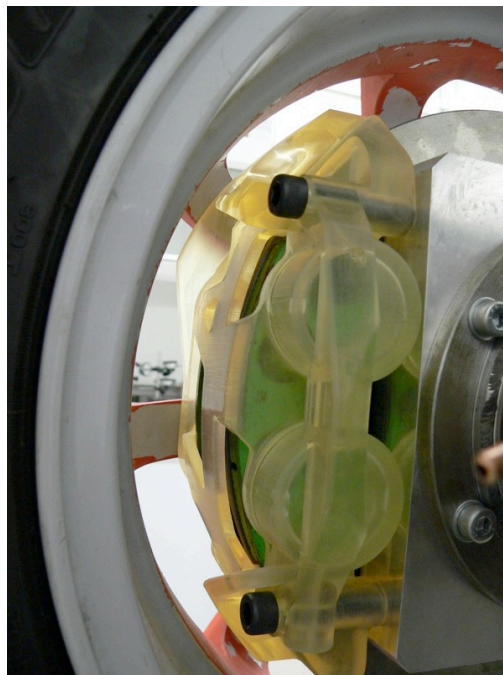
Test fit of the "W caliper" with wheel (c)
